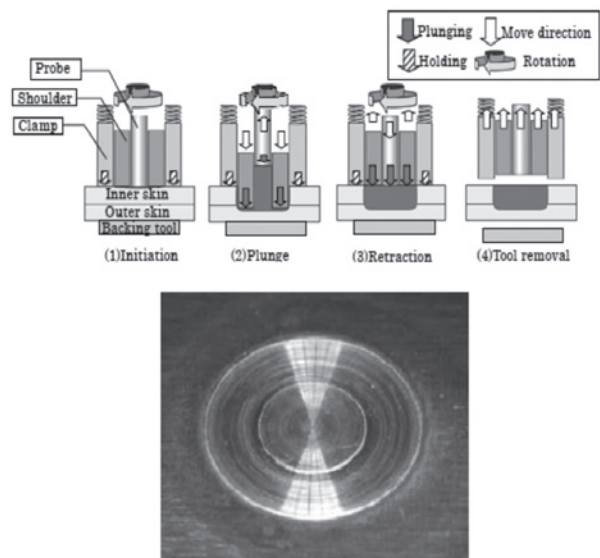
Process and surface appearance of refill friction stir spot welding.
